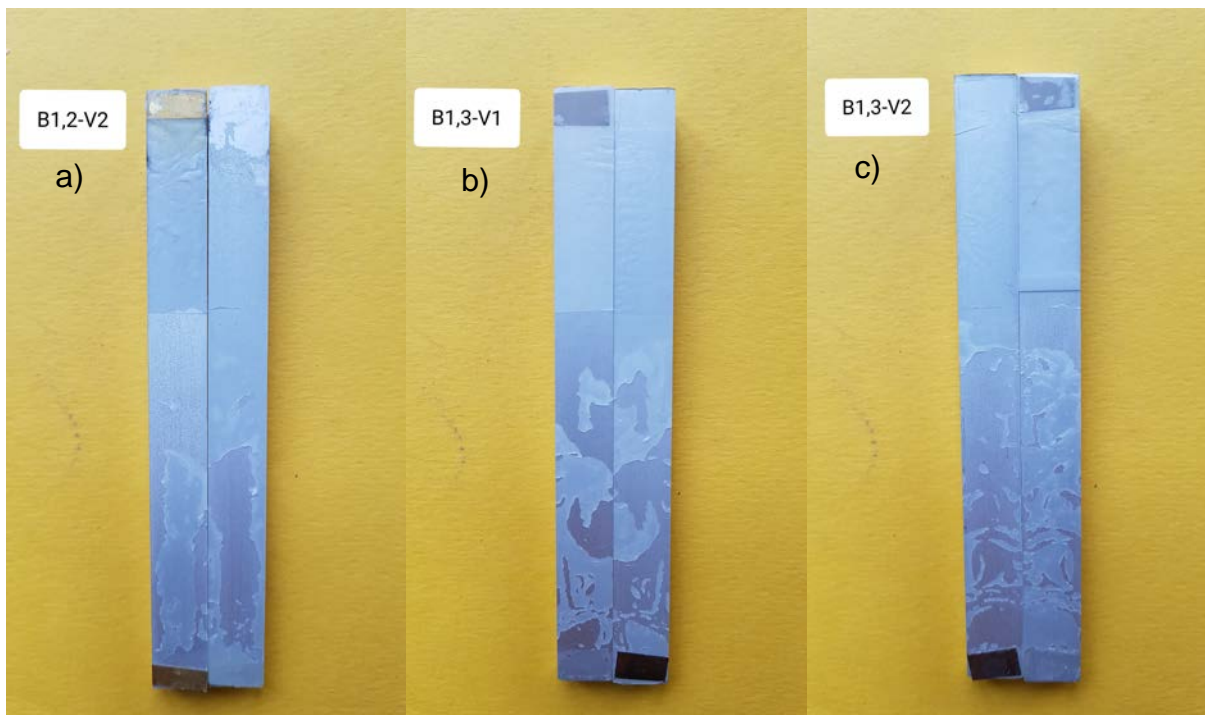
Fracture surfaces of virgin specimens.
